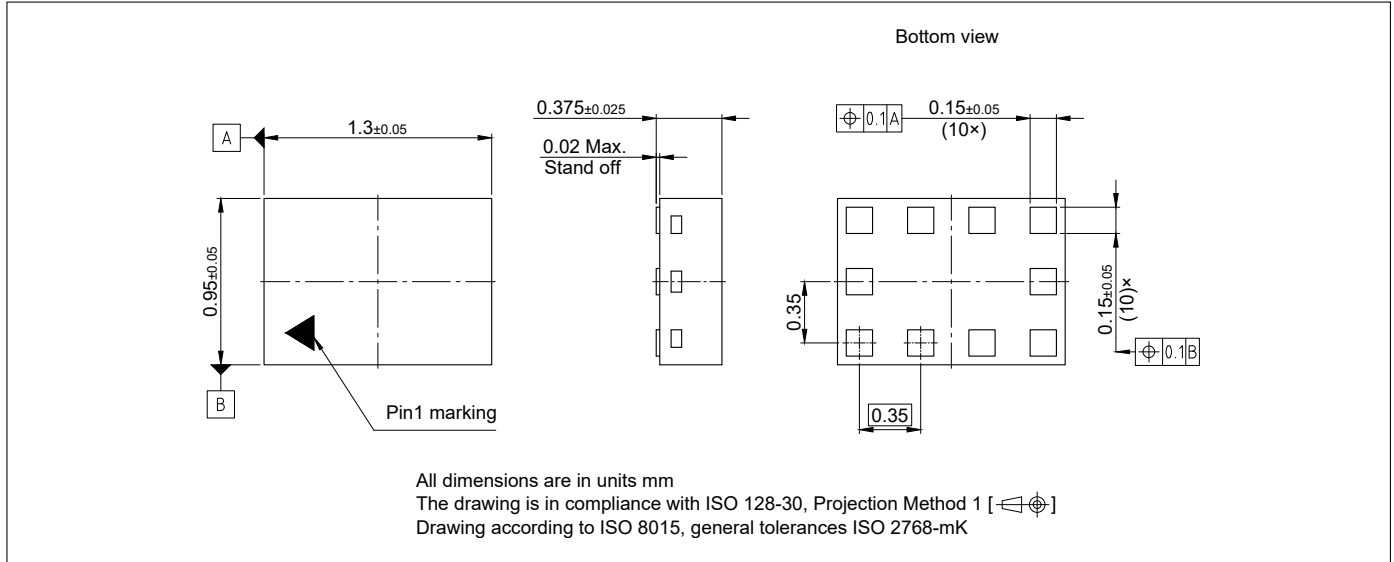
TSNP-10-9 package outline (top, side and bottom views)
